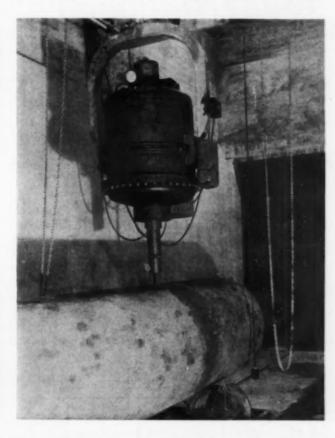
Million-volt unit at Chattanooga in position to radiograph longitudinal weld
